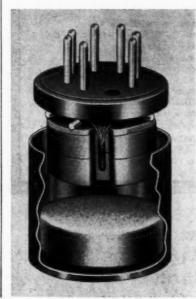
STEP TWO: Assemble, placing metered epoxy pellet in shell and inserting component and header into shell.
